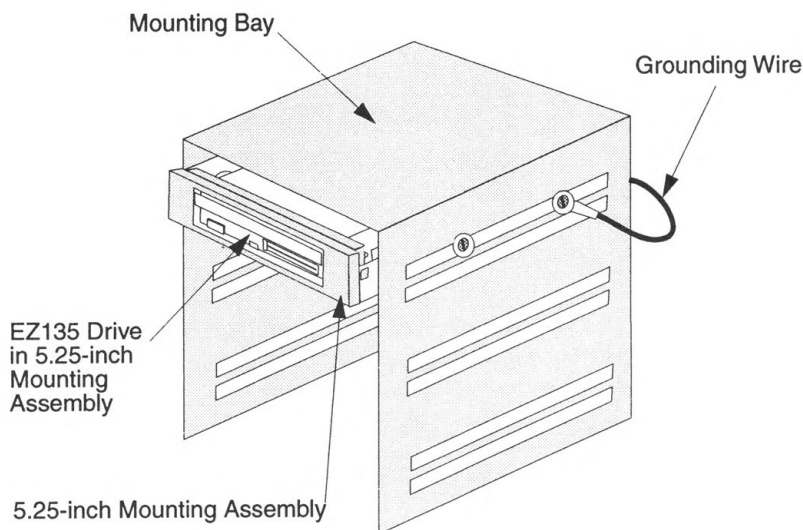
Mount the EZ135 Drive Assembly in the 5.25-inch Bay
